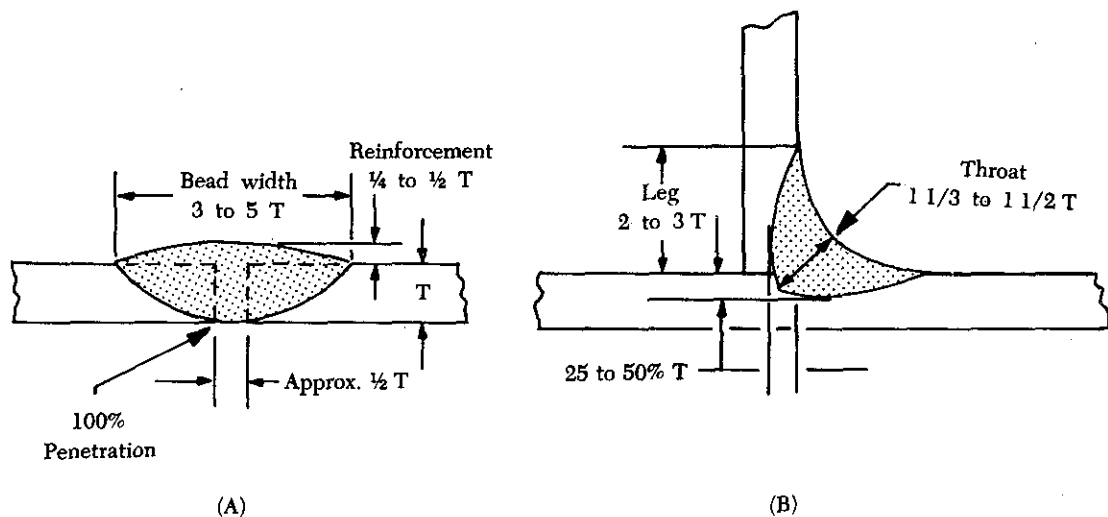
(A) Butt weld and (B) fillet weld, showing width and depth of bead.
